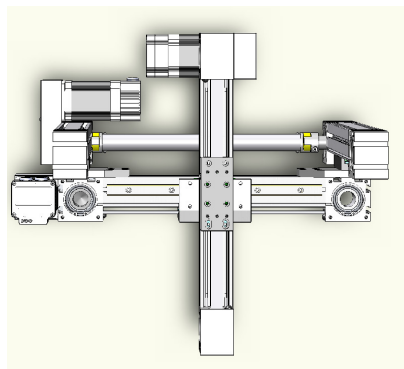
Drawing of the AEB RBT 3D stepping motor unit.
